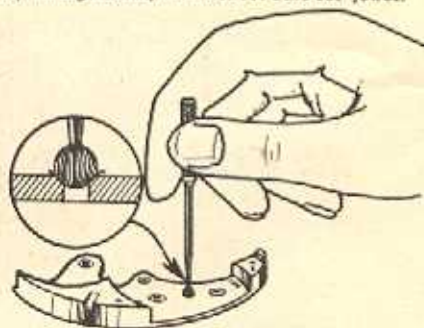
Reamer (12 included) for making proper size holes in watch plates or settings, into which jewels are inserted.
